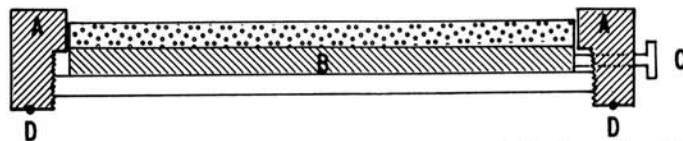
Cross section of dough molder parts: A, turned aluminum ring; B, laminated adjustable disk (top is maple, center is aluminum, bottom is Delrin); C, set screw; D,  $\frac{1}{8}$ -in. fusible belt.
